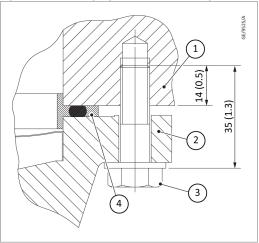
Mounting high vacuum ISO-F flange connection with clearance hole
